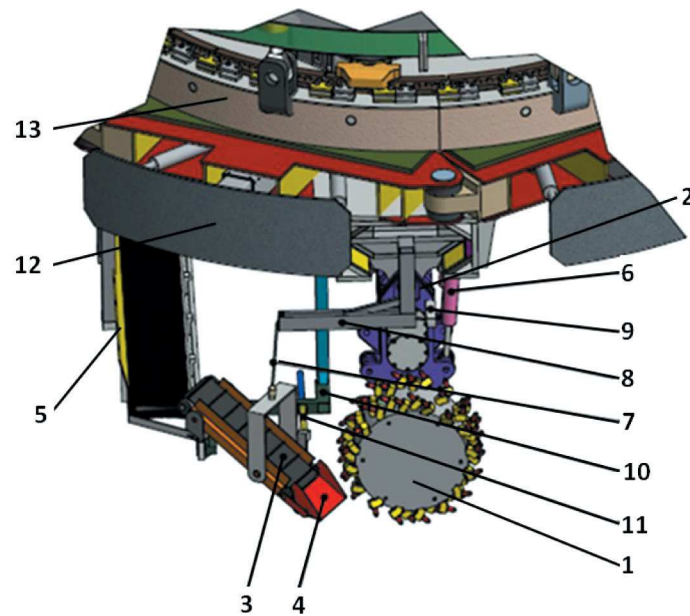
Model of innovative mining and loading device developed for shaft complex [10]: 1 – milling mining head, 2 – arm, 3 – short belt conveyor, 4 – scraper, 5 – linear belt conveyor, 6 – actuators for arm lifting, 7 – steel rope, 8 – actuators for short belt conveyor lifting, 9 – rope fixing, 10 – conveyor moving system, 11 – conveyor rotation actuator, 12 – expanding system, 13 – rotary ring
